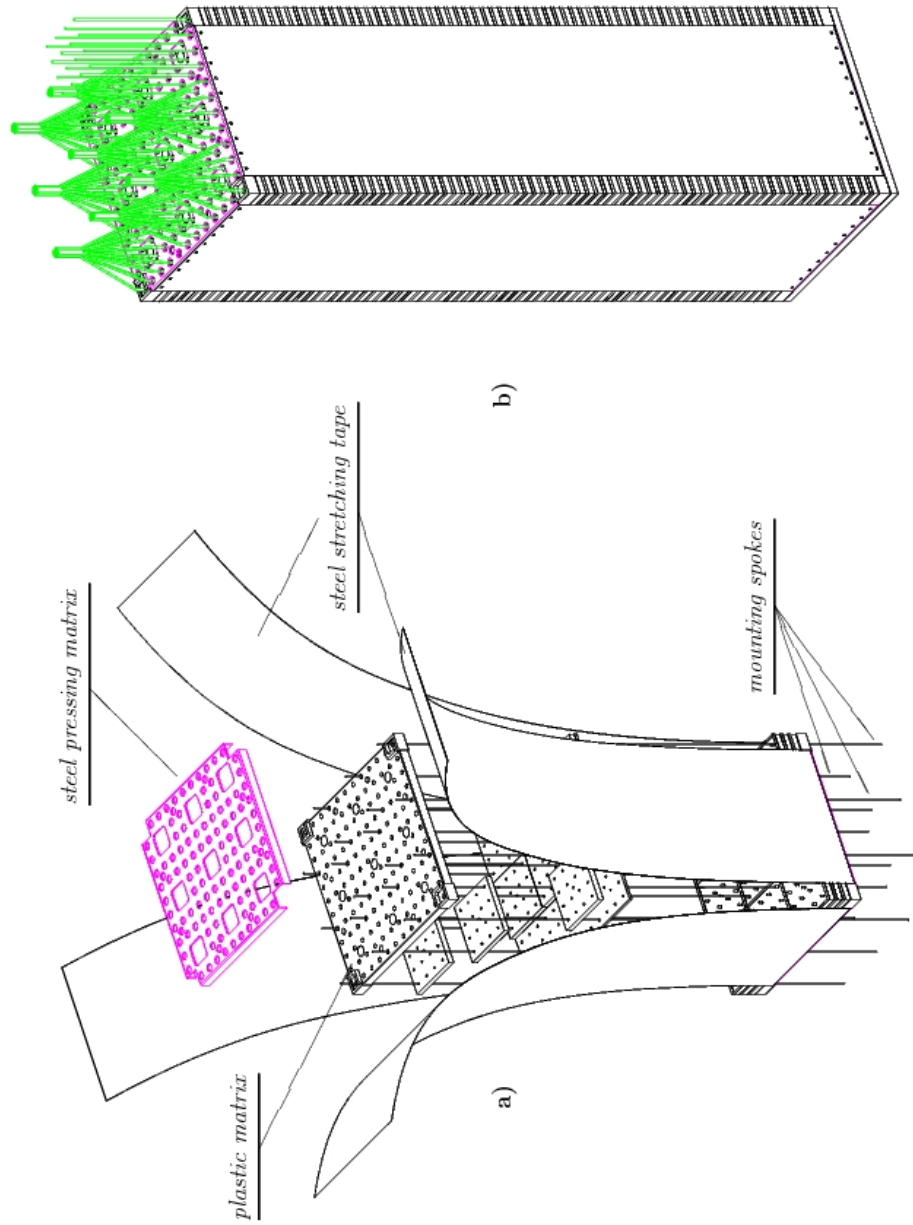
Assembly of the inner section module, first stage. Lead-scintillator stack during assembly (a) and the assembled stack with welded tape and inserted fibers (b) are shown
